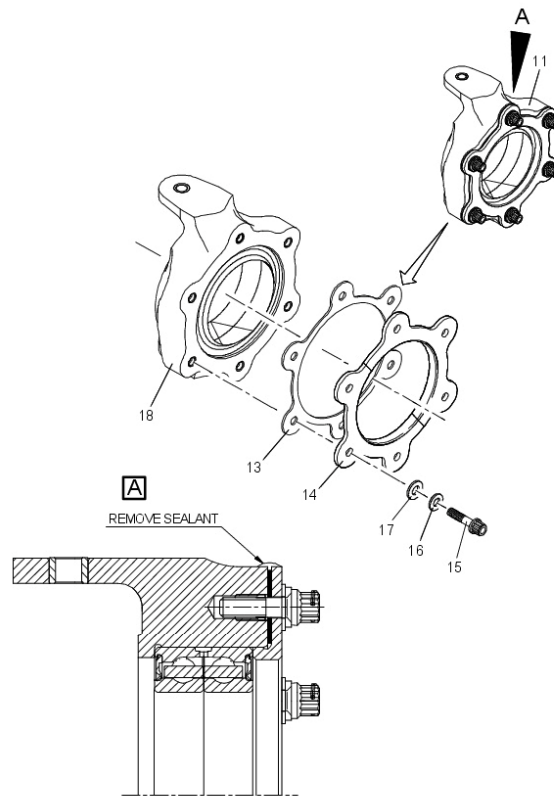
(sheet 1 of 4). Housing and slider group - Disassemble procedure (Sleeve assy P/N 109G6430A03)
